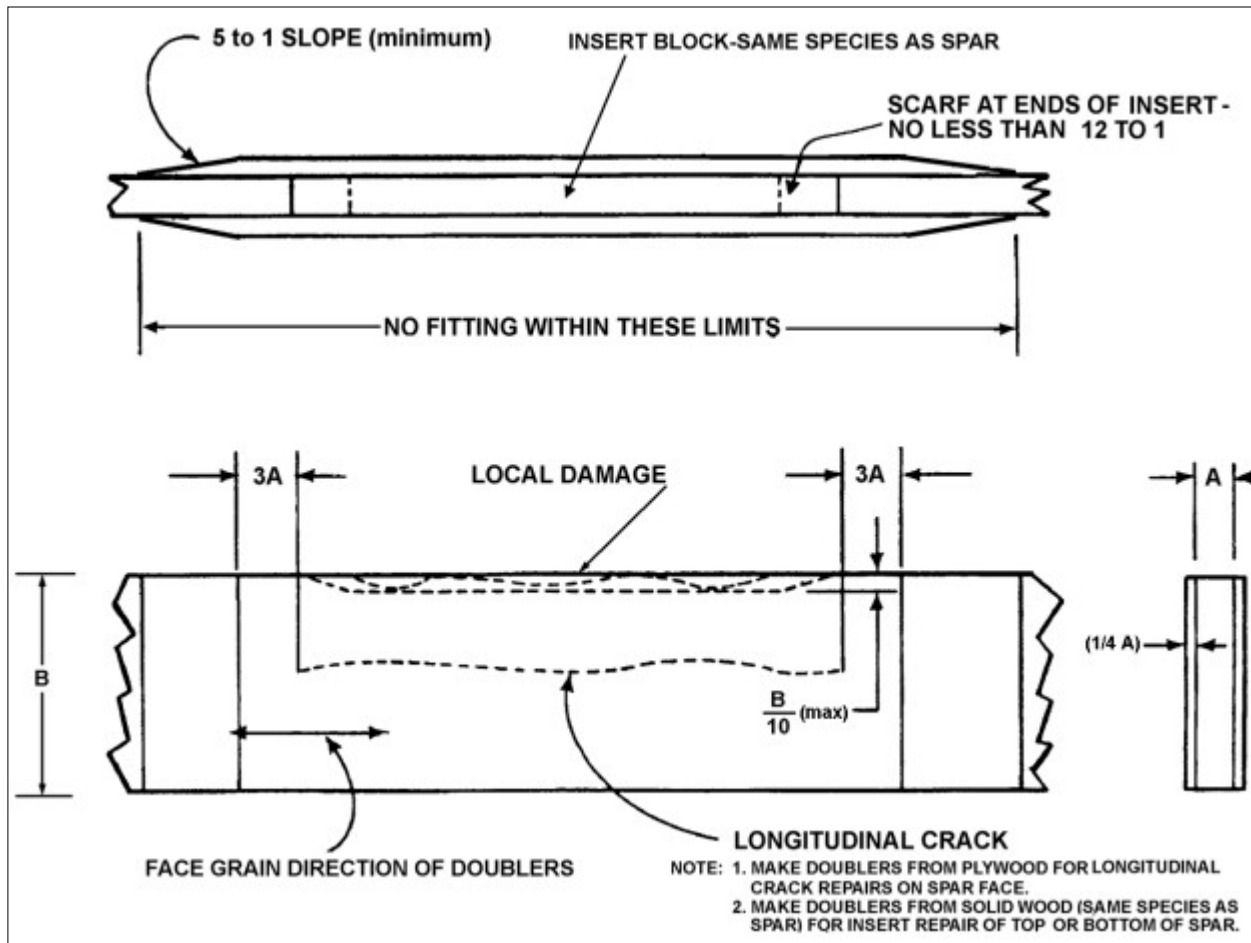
Method of reinforcing a longitudinal crack and/or local damage in a solid spar.
